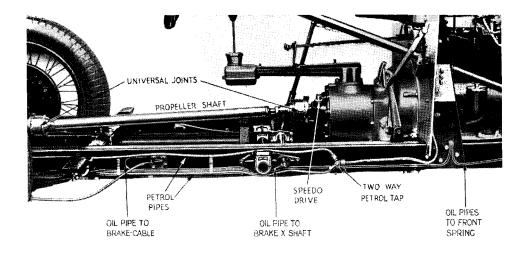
Illustration No. 7.—Near-side view of chassis, showing gearbox, propeller shaft and various controls.
